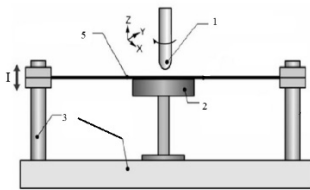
Two-point incremental forming with spherical tip tool and partial die, [16]: 1 - Main tool; 2 - Partial die; 3 - Fixture; 5 – Raw material; I - Tool penetration movement in Z-axis direction
